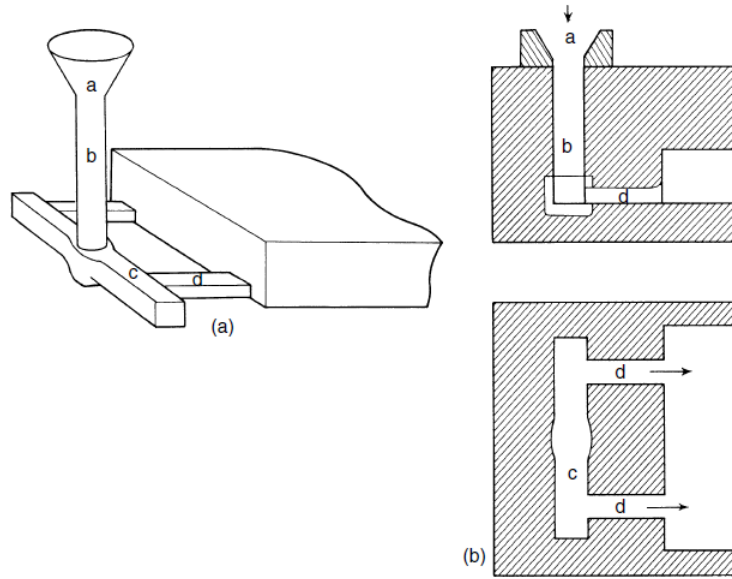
Principal features of a gating system; (a) Bush or basin, (b) sprue or down runner, (c) runner and (d) ingate [15]
